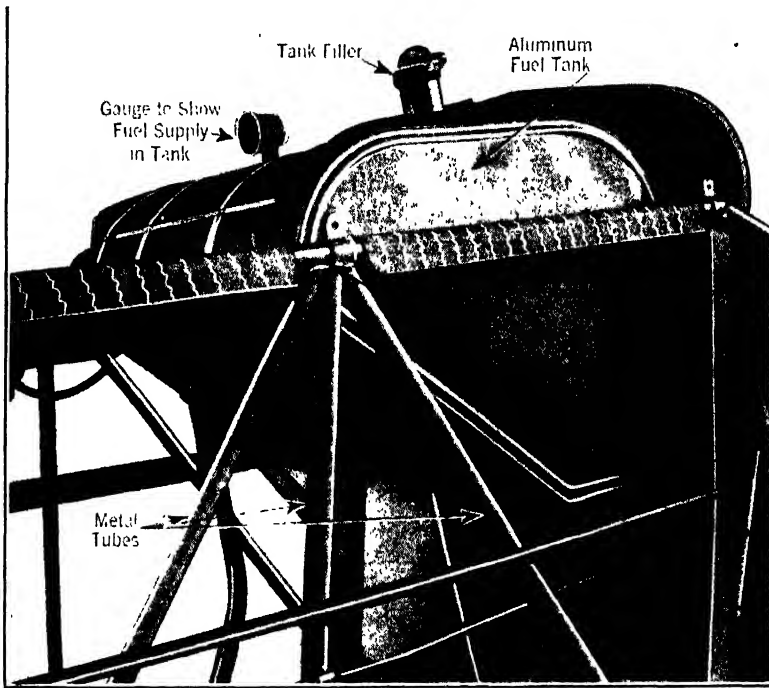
Mounting of Aluminum Fuel Tank in Pitcairn Orowing Airplane. Tank may be Removed by Releasing Nut and Straps and without Disturbing Top Cowling.
